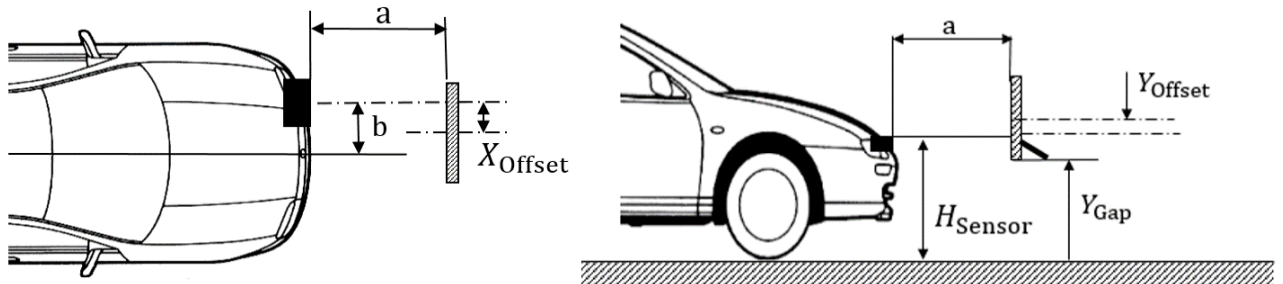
Setup at vehicle manufacturer's production line, top (left) and side view (right)
